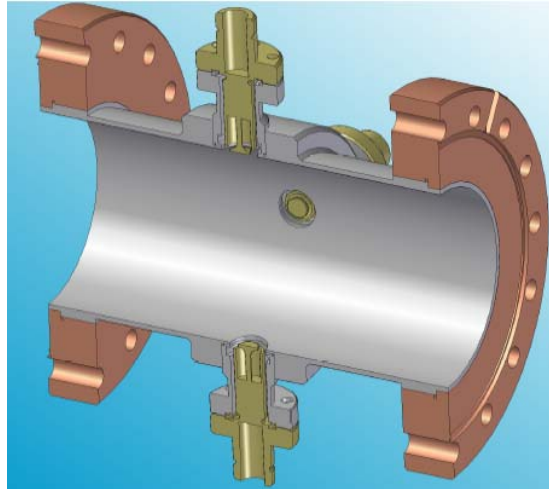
Cross cut through the first prototype BPM housing. One of these prototypes is installing in FLASH, one is now mounted to a cryogenic module at FERMILAB and the last of this first prototype housing will be installed in a new module in Flash in spring 2008.
